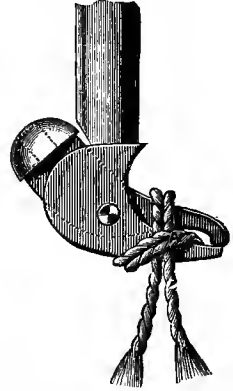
Jaws closed on string; the string-knife then cuts the ends, and the lever draws the string off, completing the knot.
